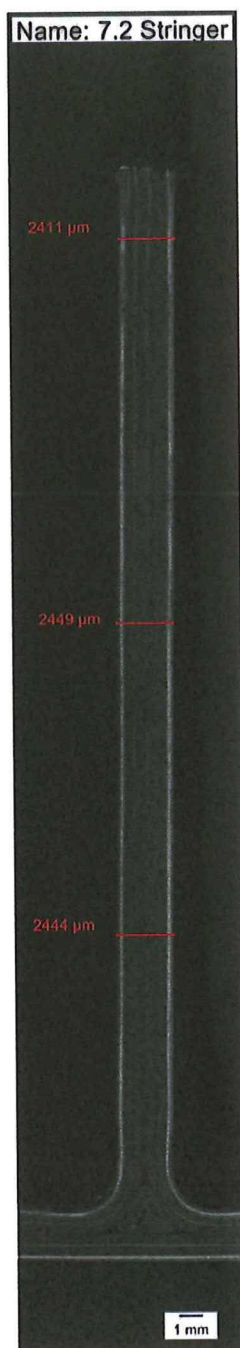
Cross section of panel 12 stringer 2 skin
